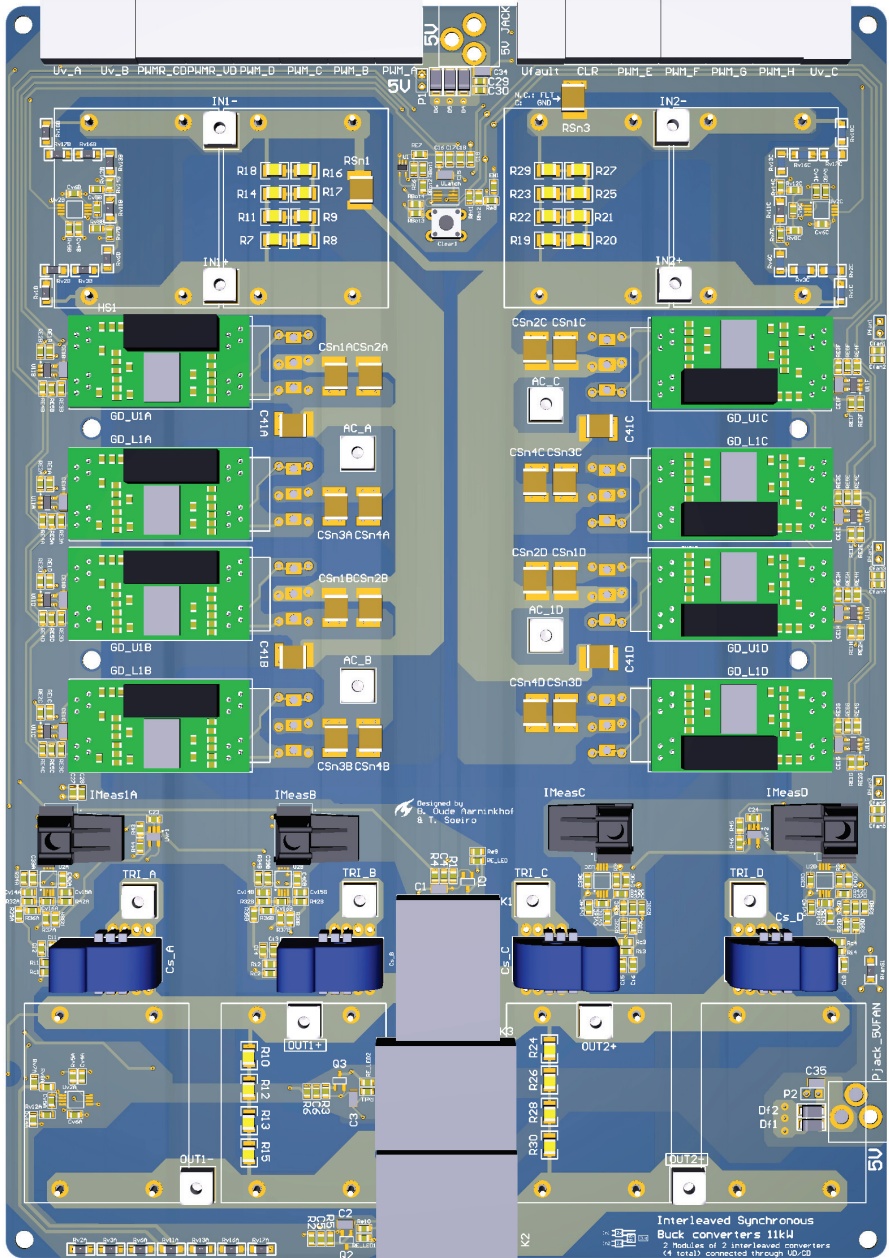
A render of the designed Interleaved TCM Buck PCB using Altium. For a specification of the different regions on this PCB, see Figure 7.2.
